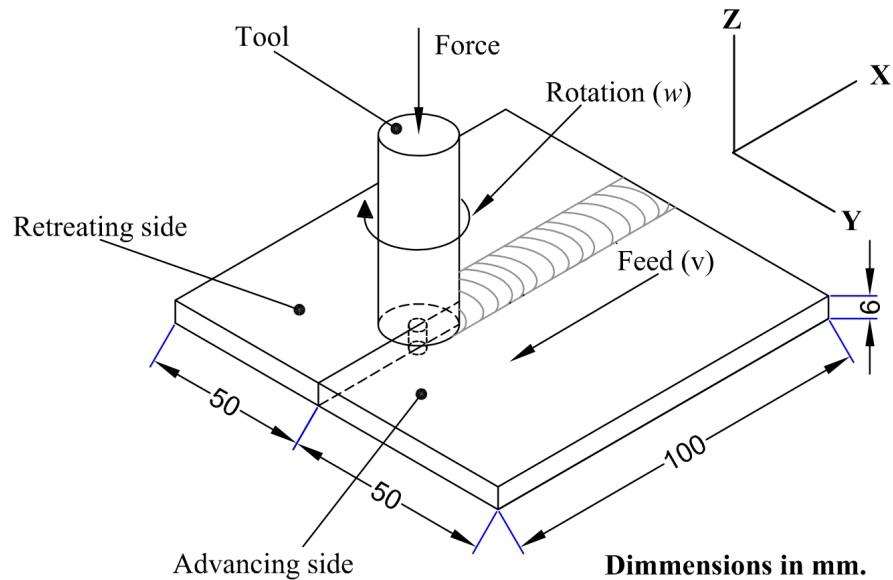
A Schematic Representation of FSW Setup in a Vertical Milling Machine.
